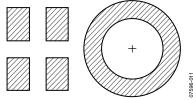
Example PCB Land Pattern with No Enclosing Ring
